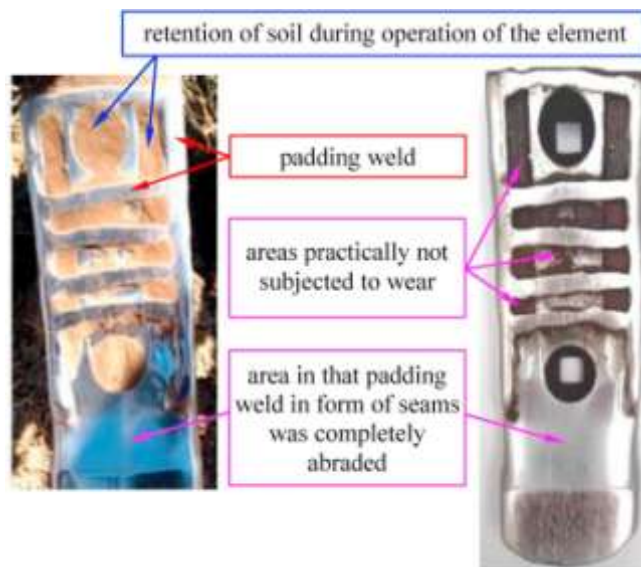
Coulter A/2 – protective action of the padding weld in form of seams.
